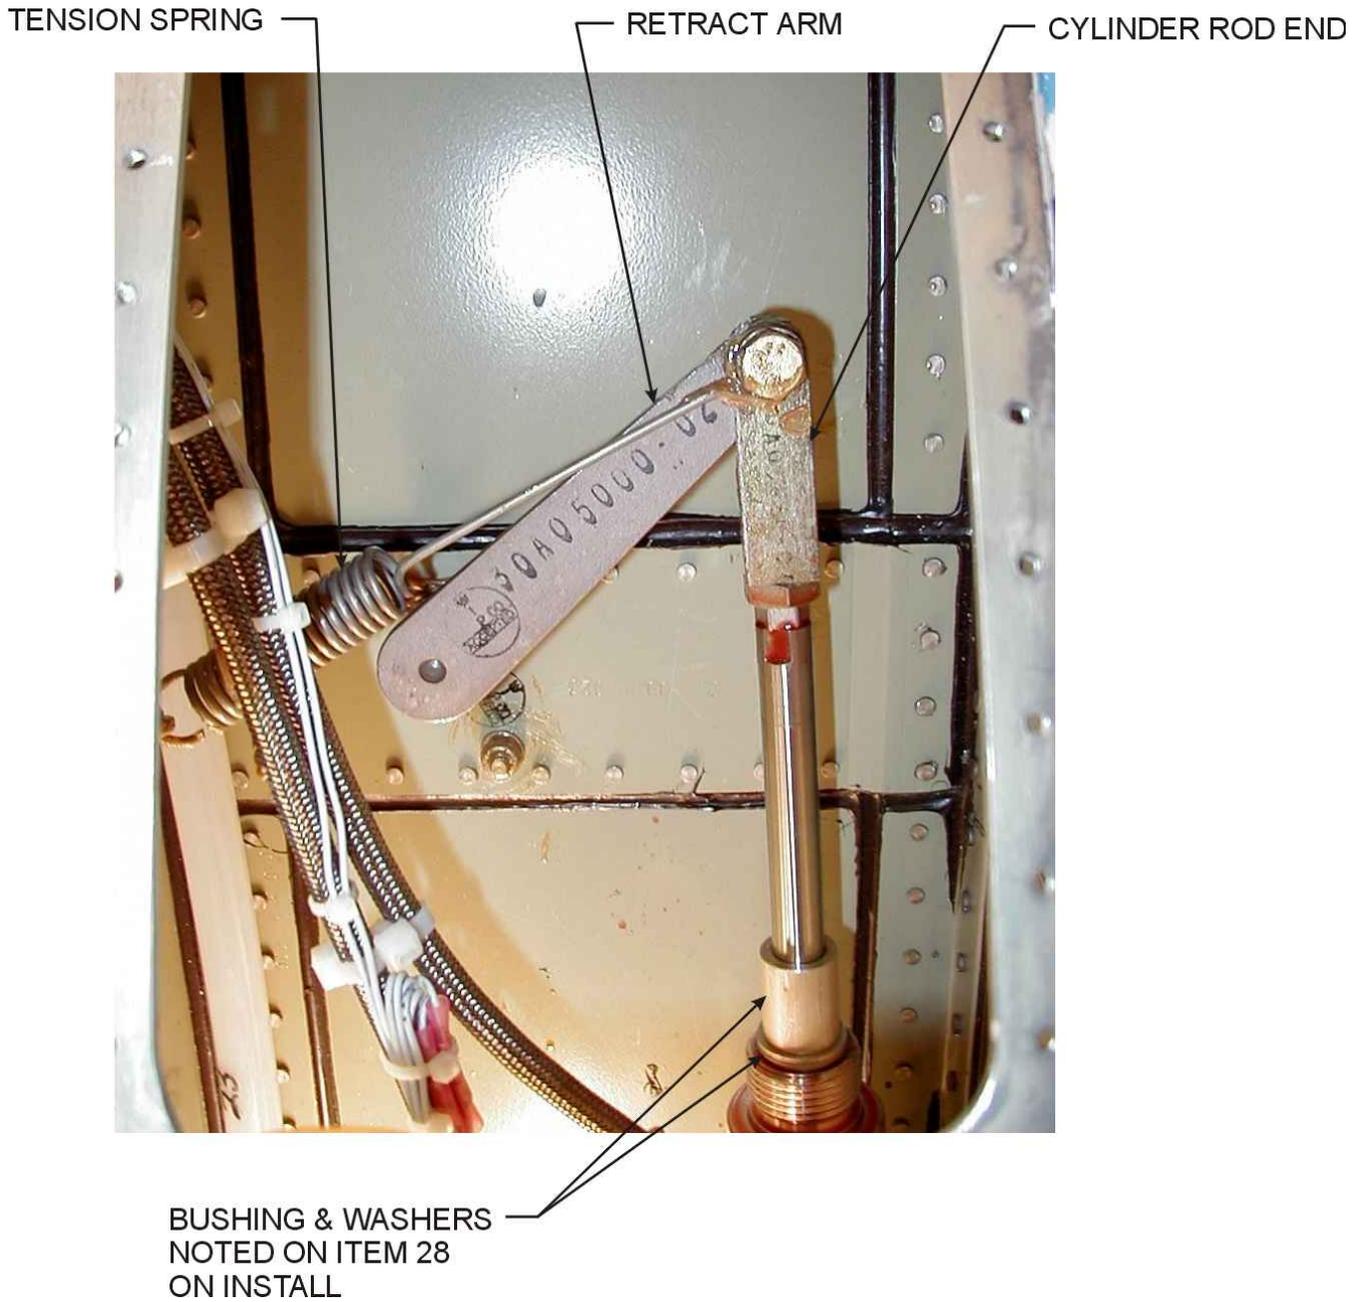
VIEW OUTBOARD ACCESS HOLE CYLINDER IINSTALLATION
